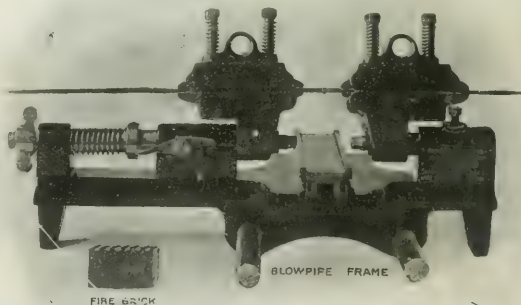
MACHINE FOR ALUMINIUM WELDING.
